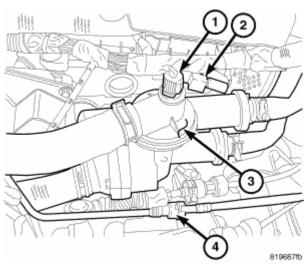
COOLANT ADAPTER Courtesy of CHRYSLER LLC
